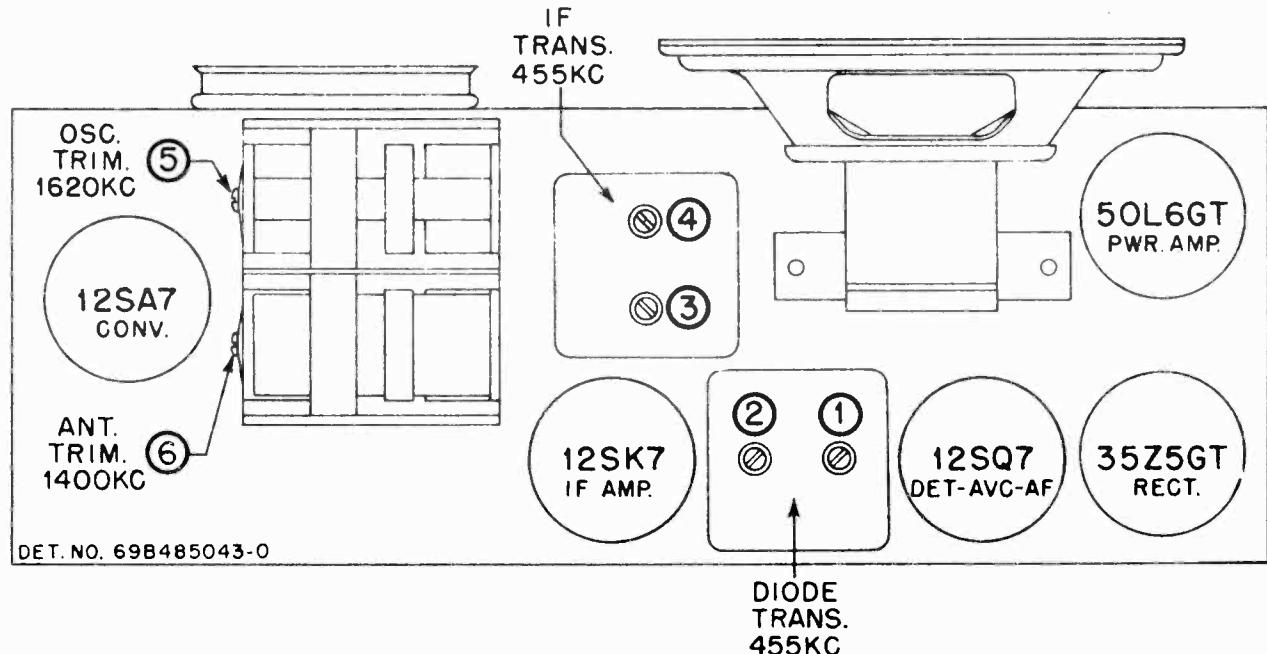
CHASSIS HS-158 TUBE &amp; TRIMMER LOCATIONS
